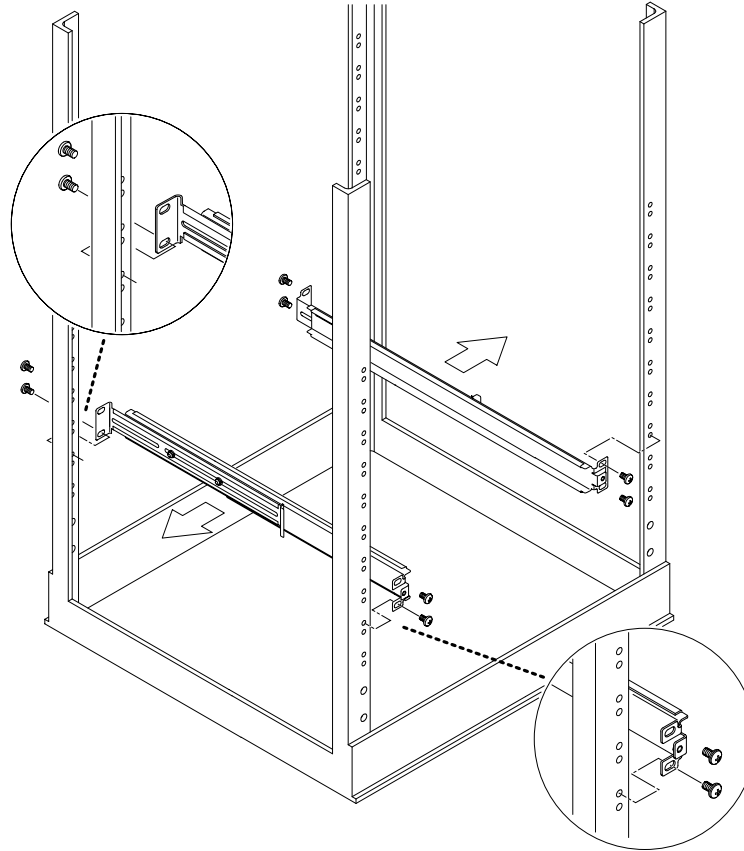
Fastening the Slide Mounts to a Standard 19-inch Rack
